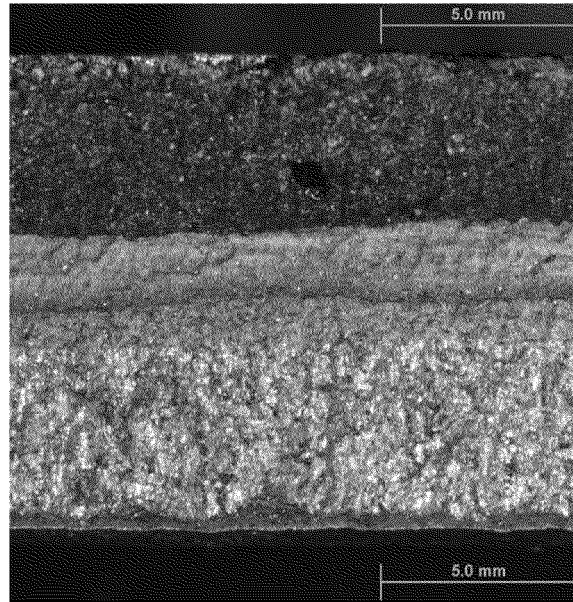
Fracture Surface Before Cleaning, 5X (photo by Exponent)
